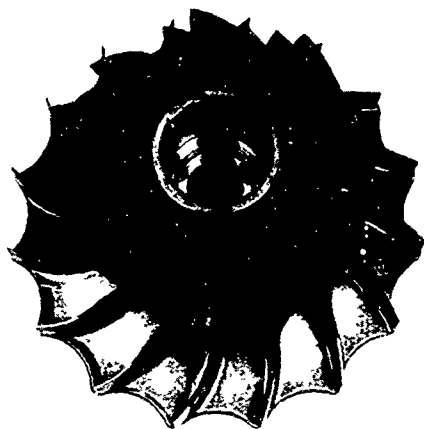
Front Face of Finish Machined and Balanced Impeller Prior to Burst Test (#78-3922)
